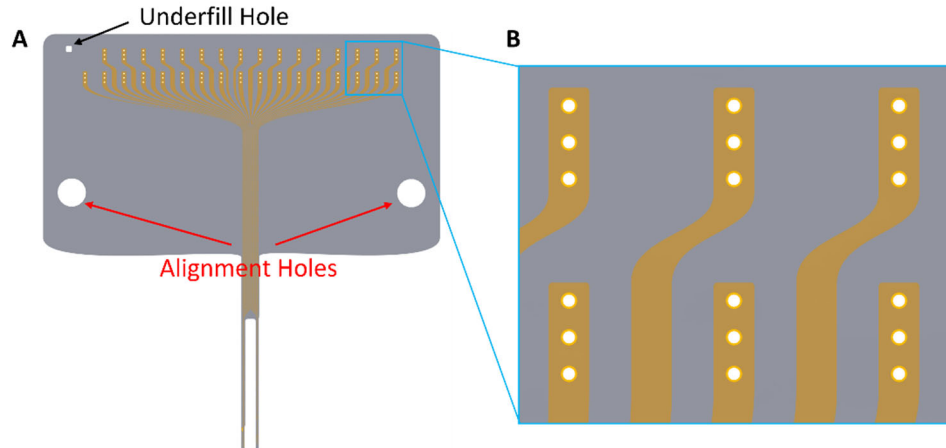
(A) CAD model of ball bonded probe with alignment holes and underfill ports. (B) Zoomed-in view of pads with three 60 μm vias/pad.
